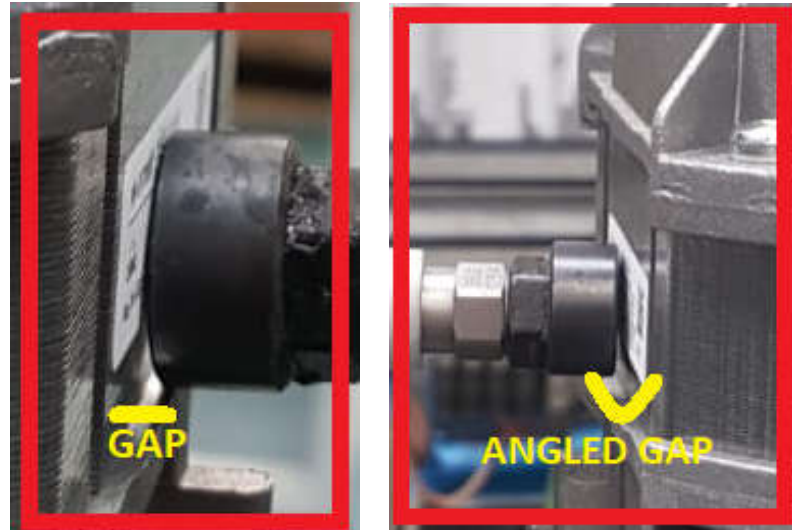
Two examples of the sensor mounting problems: The angles that occur as a result of trying to mount the sensor on the protruding surface instead of the flat surface of the motor (left). The angle is formed because it cannot cut its connection with the three-finger mechanism holding the sensor (right).
